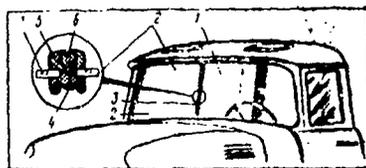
Installation of Divided Windshield on ZIL-130 and ZIL-131: 1, left half of panoramic glass; 2, right half of panoramic glass; 3, upright with seal and lock, assembled; 4, cross section of upright; 5, seal; 6, seal lock
